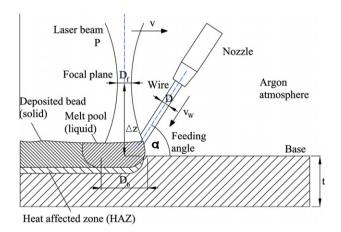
Schematic drawing of the wire-feed deposition process used for the manufacture of the Ti-6Al-4V blocks.
